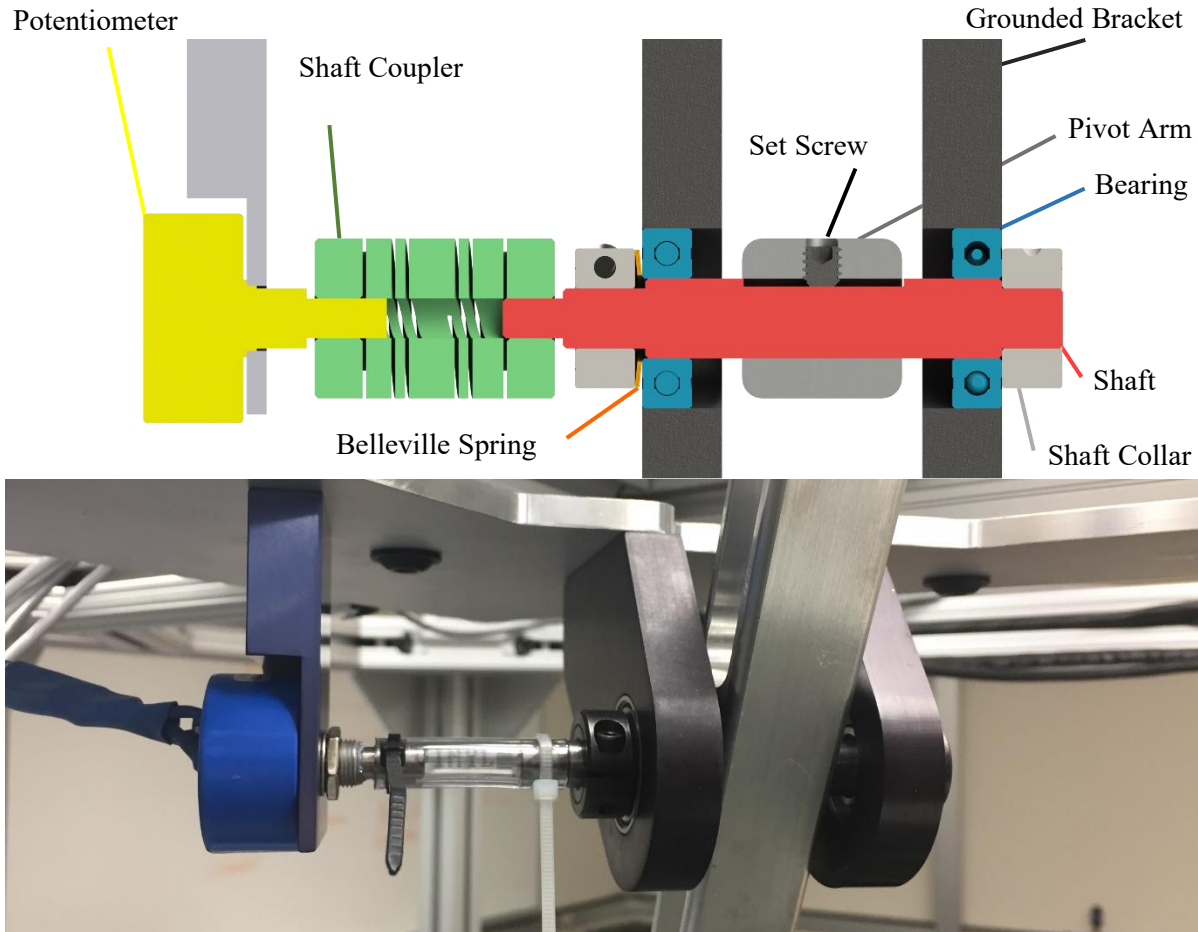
The third iteration of the pivot bearing assembly. The top shows the layout of the design, while the bottom is the installed version currently on PARTNER.
